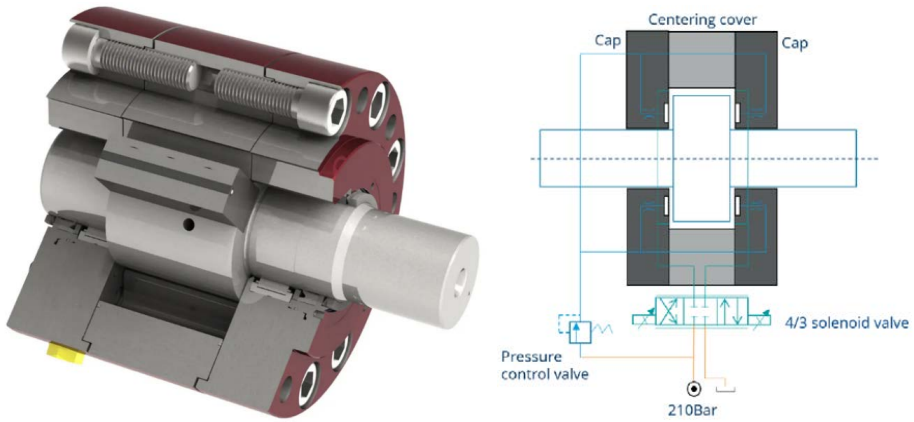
Swivel drive SP 15 D and typical hydraulic layout of the thrust bearing
